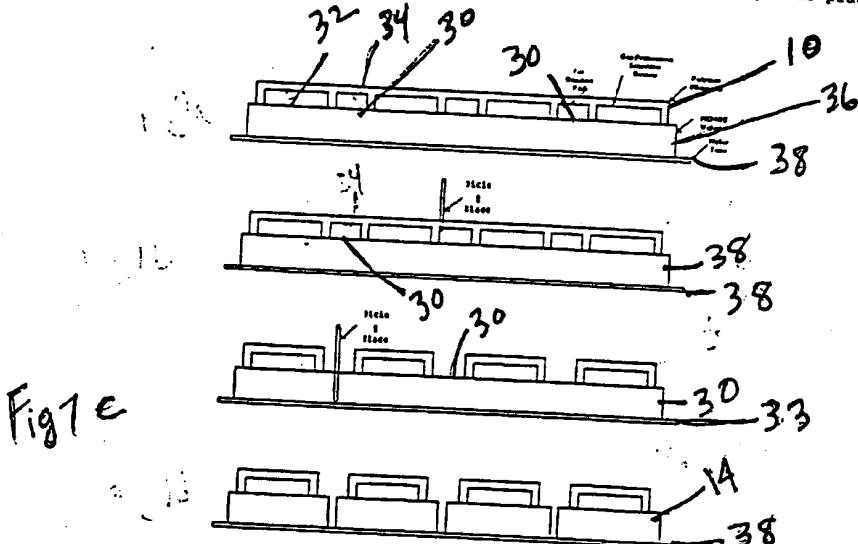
Demonstration of a simple method for opening up bonding pads from the microcap package. The dicing saw makes a "release pass" to open bonding regions, then makes the dicing cut through the wafer.
